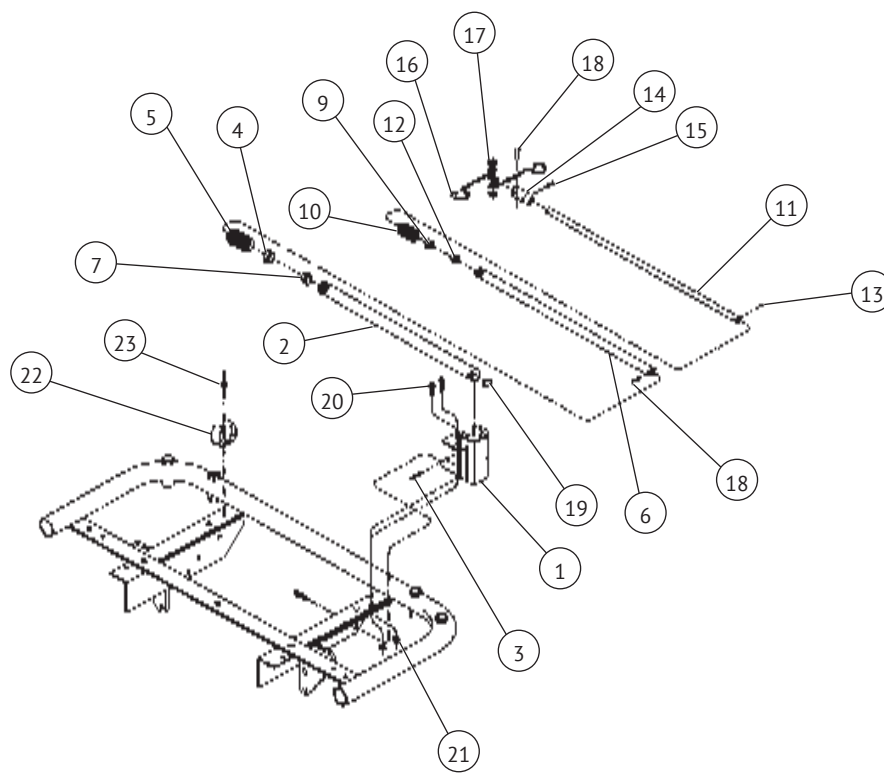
DPA I.V. ROD ASSEMBLY (BEFORE 10/1/98)
